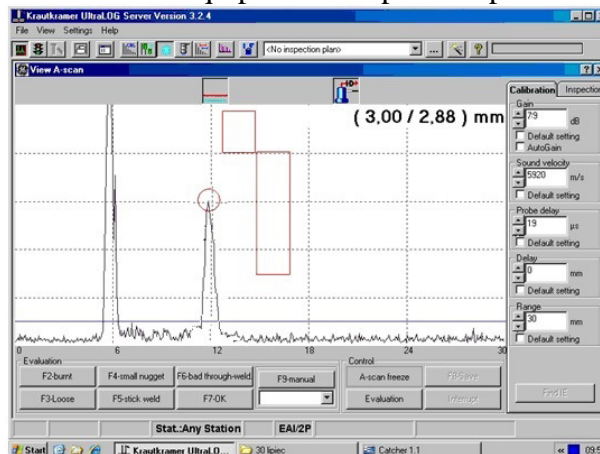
View of the ultrasonic pulses obtained during the test of welded joint - visible pulse coming from the bottom of the tested weld - USLT 2000 flow detector
